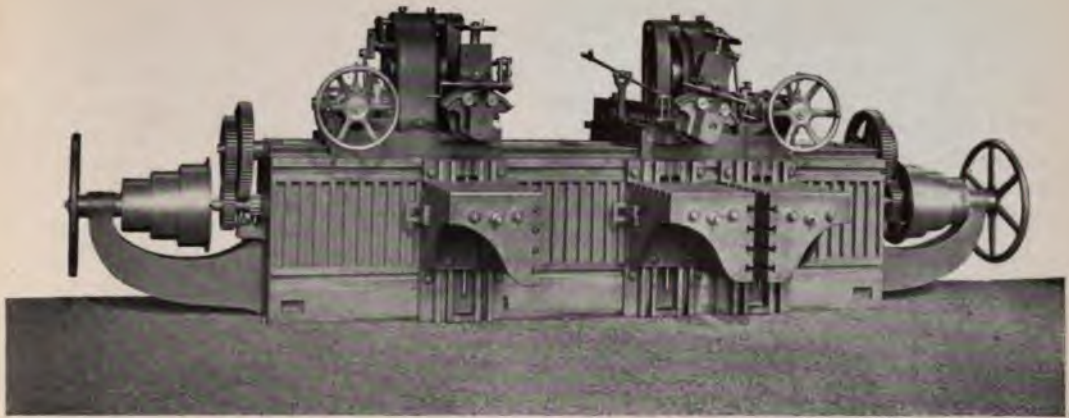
DOUBLE HEADED SHAPING MACHINE. (Thomas Shanks & Co.)
